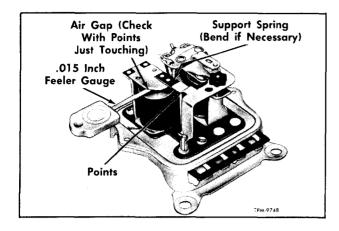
Adjusting Field Relay Air Gap (Two-Unit Type Regulator) (Typical)
